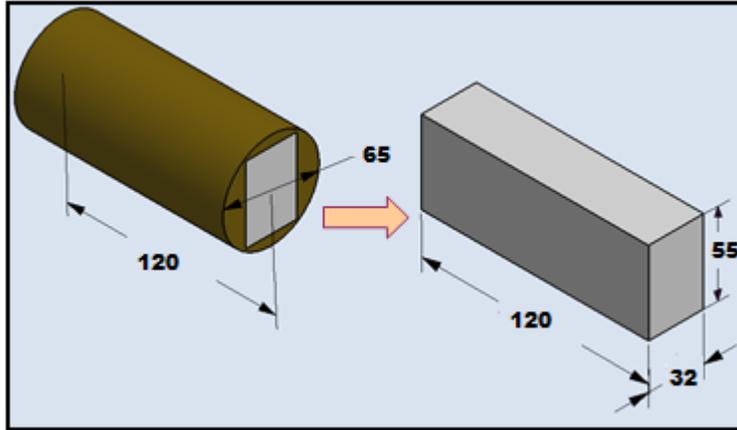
Scheme of the workpiece geometry used in this study (units in *mm*).
